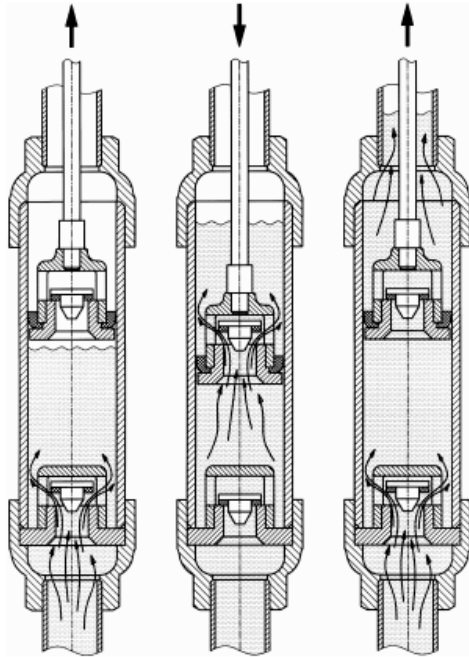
Check valve mechanism on reciprocating hand pumps. (*EMAS*)
